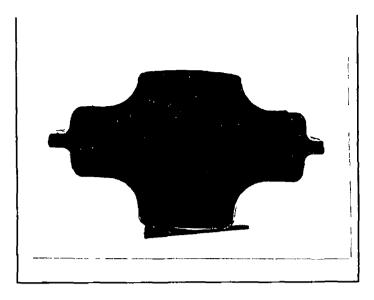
8 A cross section of the forging just before the die failure
